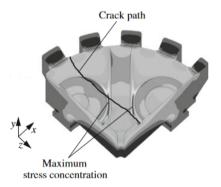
Fatigue crack, a gear failure, image extracted from [98].
